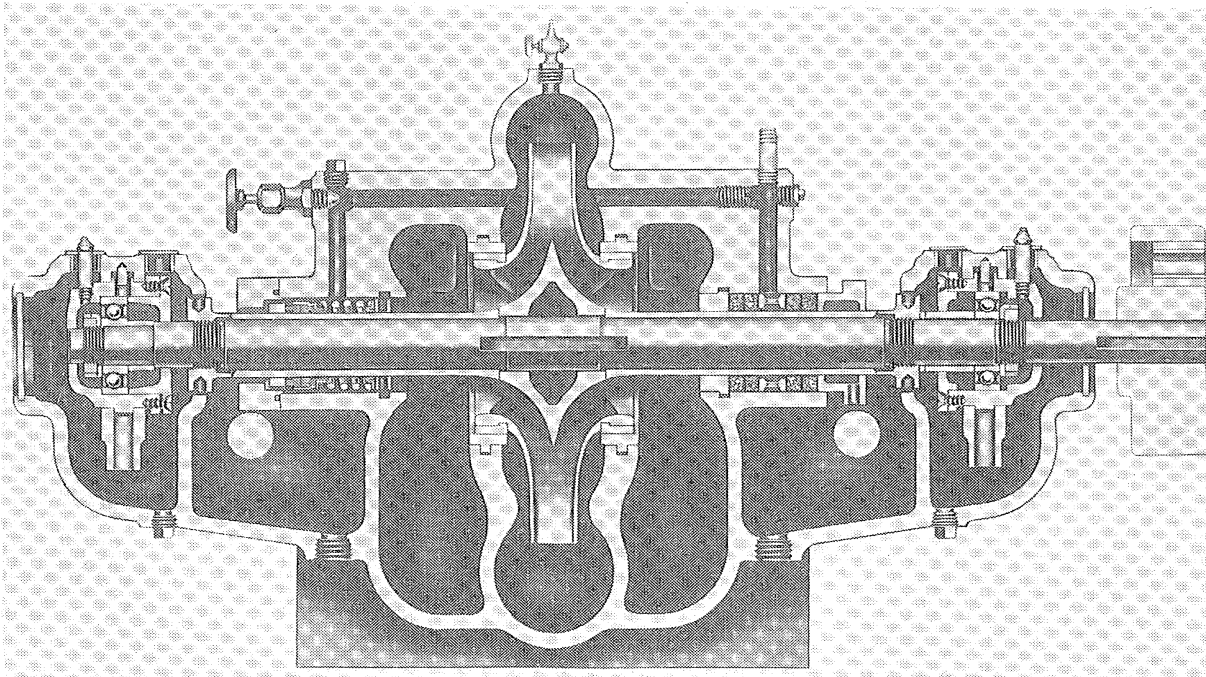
Sectional View of 5x4 SK Pump Showing Both Mechanical Seal and Packing.
